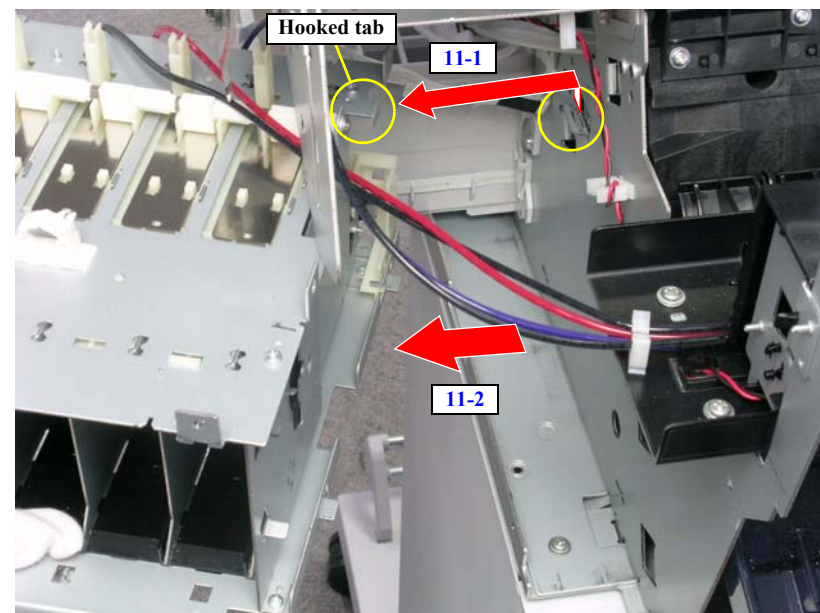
Removing the HOLDER ASSY., IC, LEFT (1)
